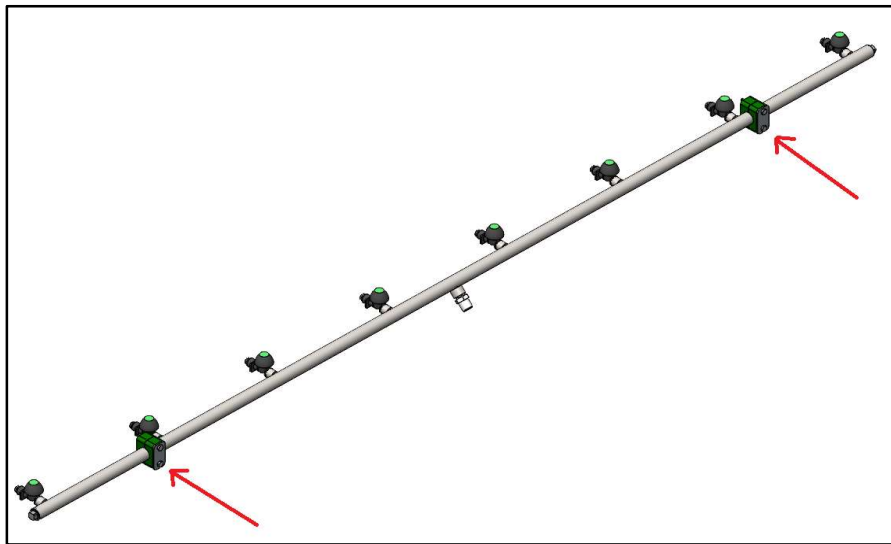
Positions of the manifold mounting clamps. Each clamp is between the outer nozzles and the second nozzle inboard. The mounts are biased heavily towards the second nozzle inboard.
